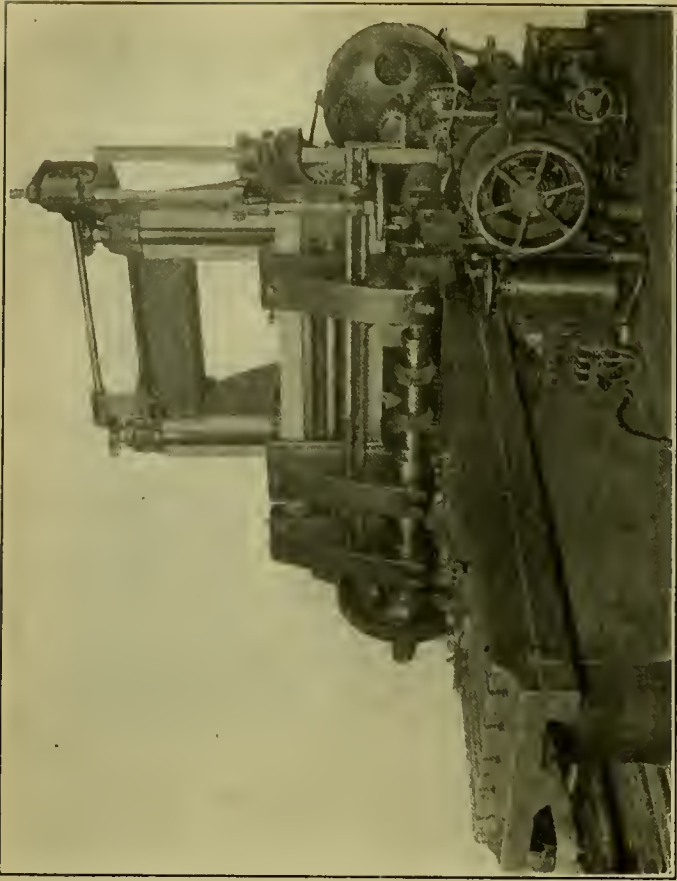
CROCKER-WHEELER MULTIPLE-VOLTAGE MOTOR DRIVE UPON A LARGE HORIZONTAL MILLING MACHINE.—BEMENT, MILES & CO.
